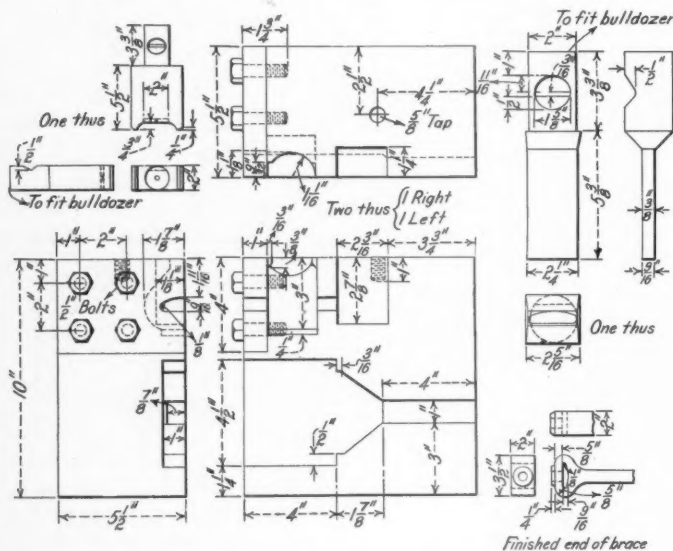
Dies for Forging the Back End of Back Tube Sheet Braces
